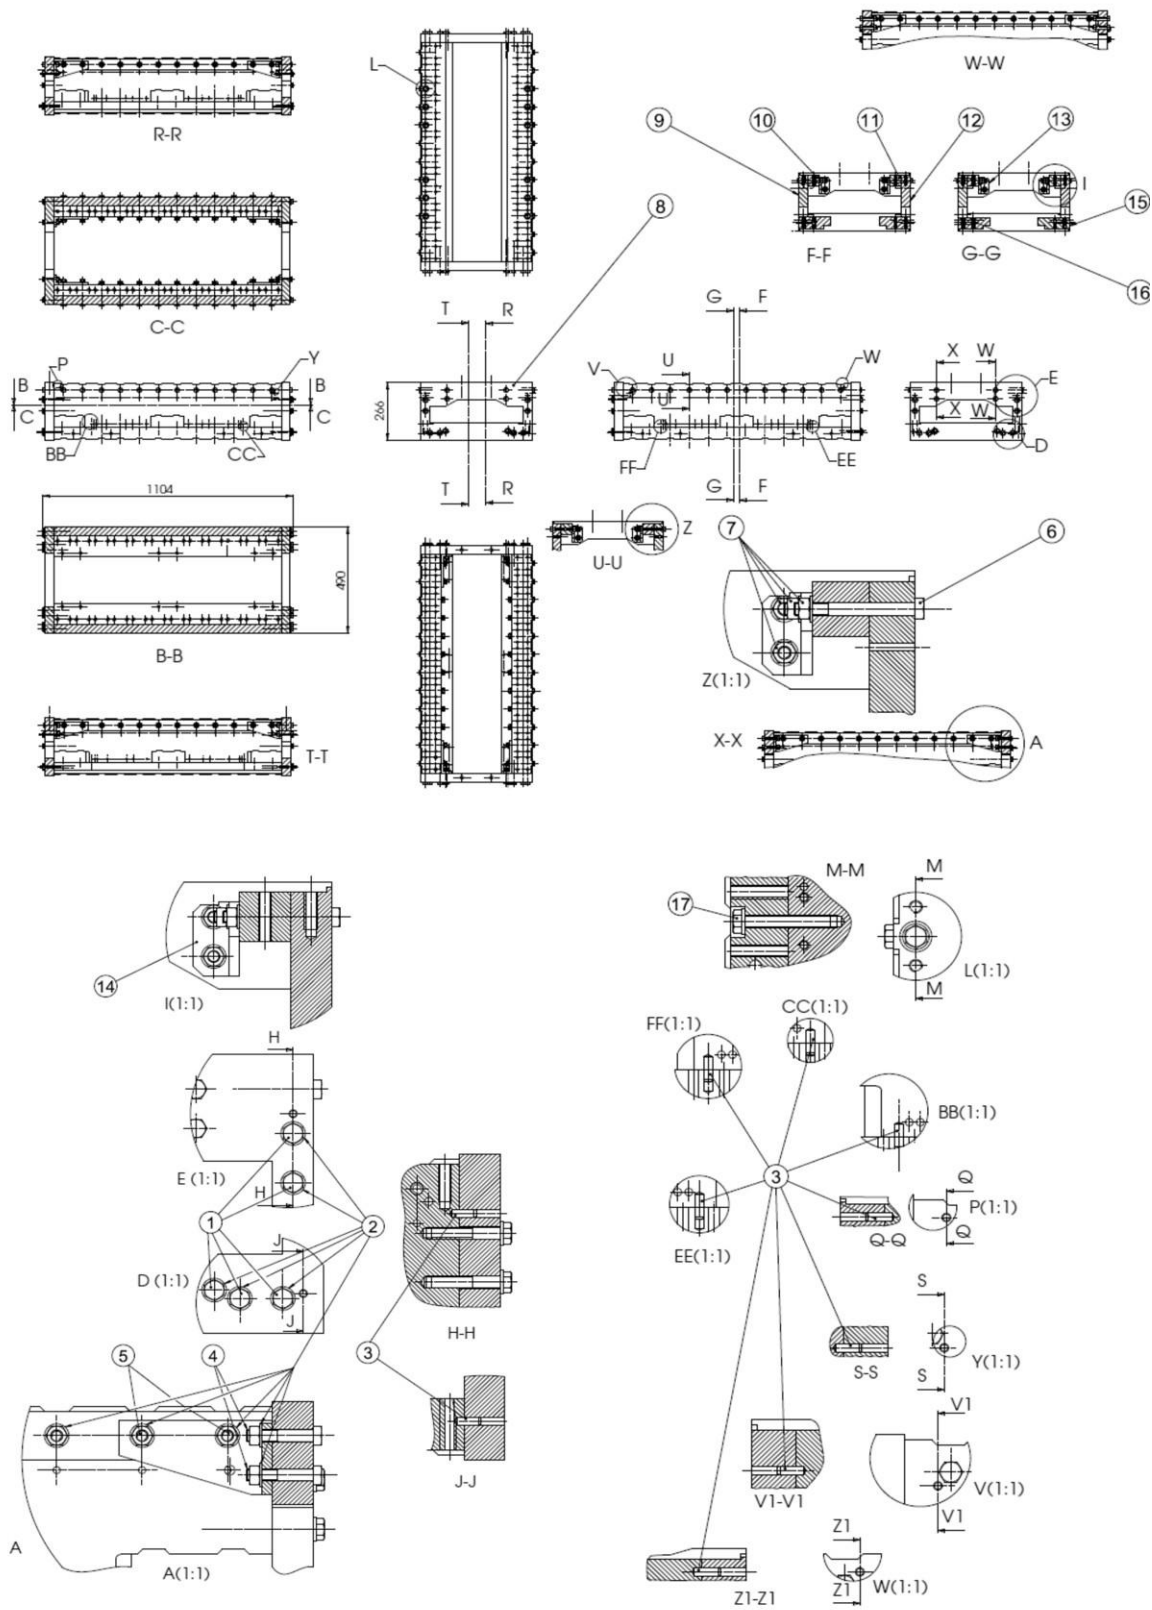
Technical drawing of the actuator frame manufactured in non-magnetic aluminum alloy.
